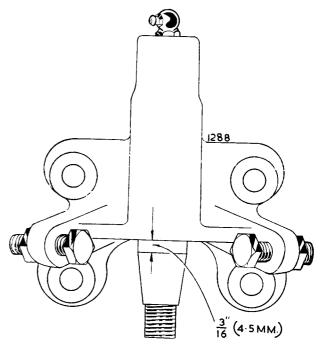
Setting dimension for the steering idler fulcrum pin.
